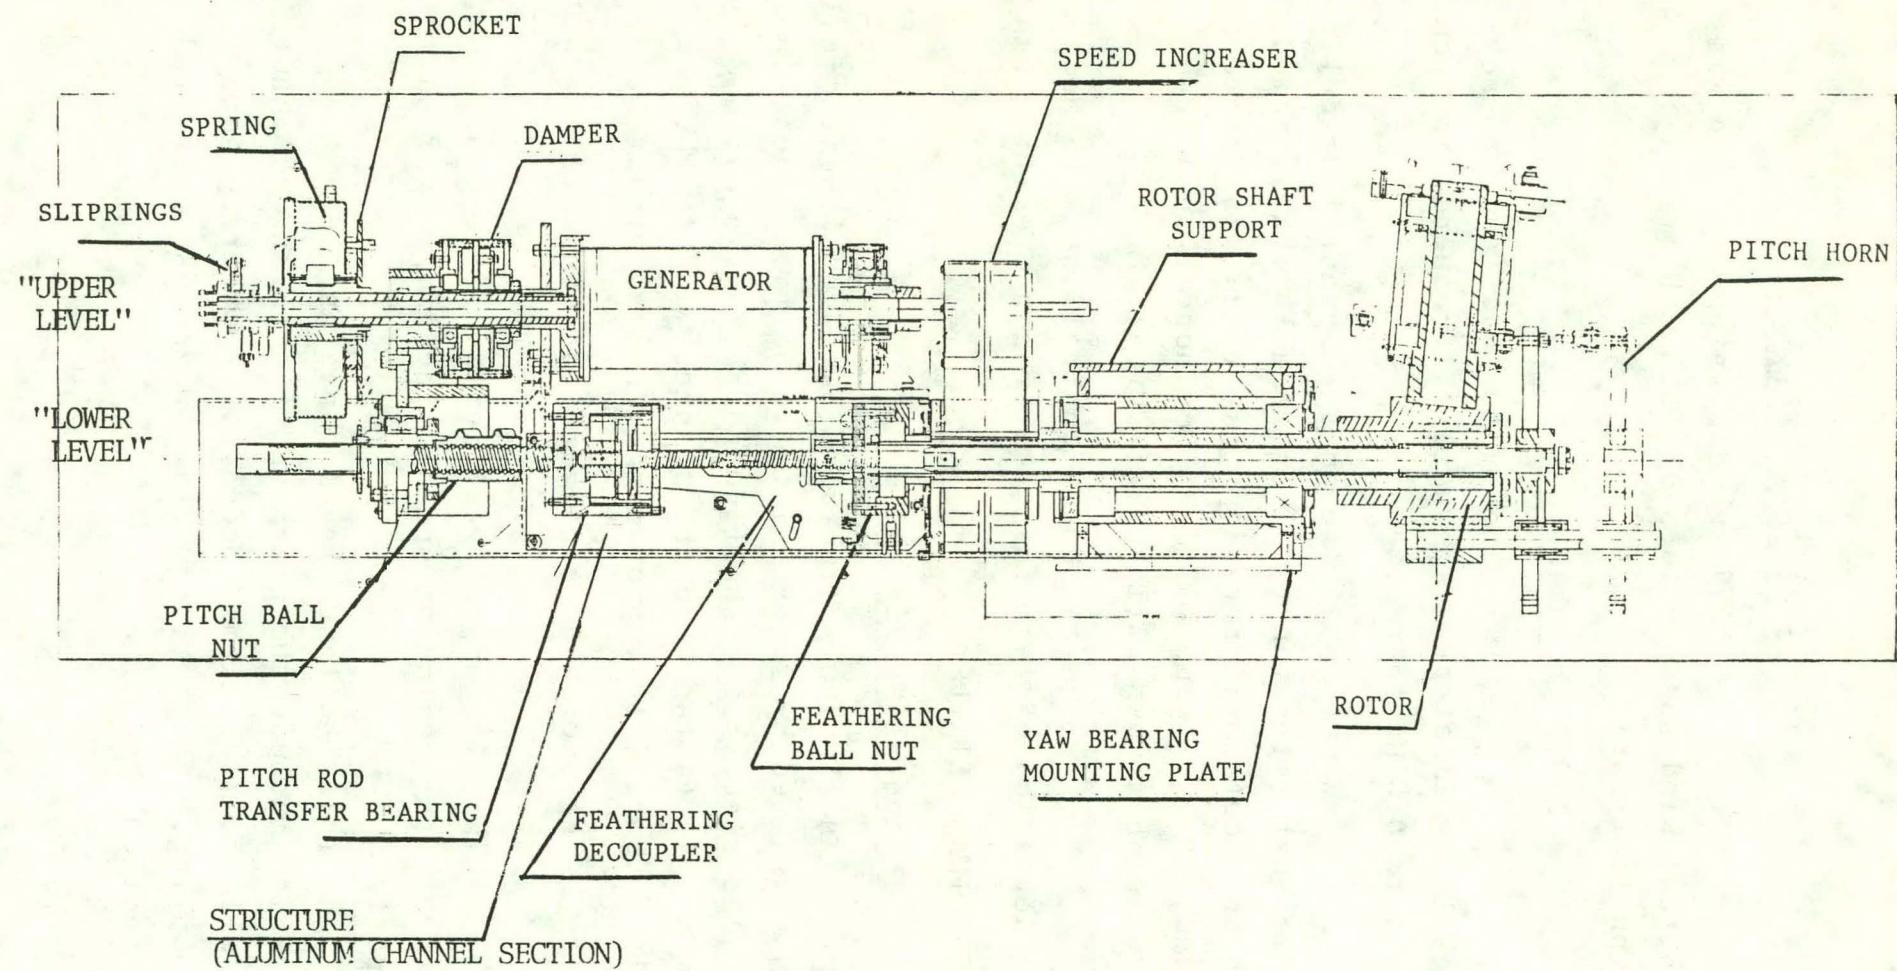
MECHANICAL SUBSYSTEM ASSEMBLY - FDR
